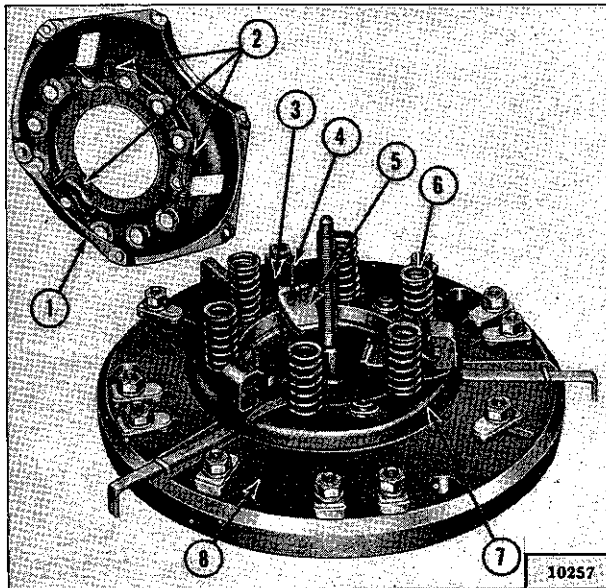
SIX-SPRING CLUTCH COVER PLATE REMOVED
